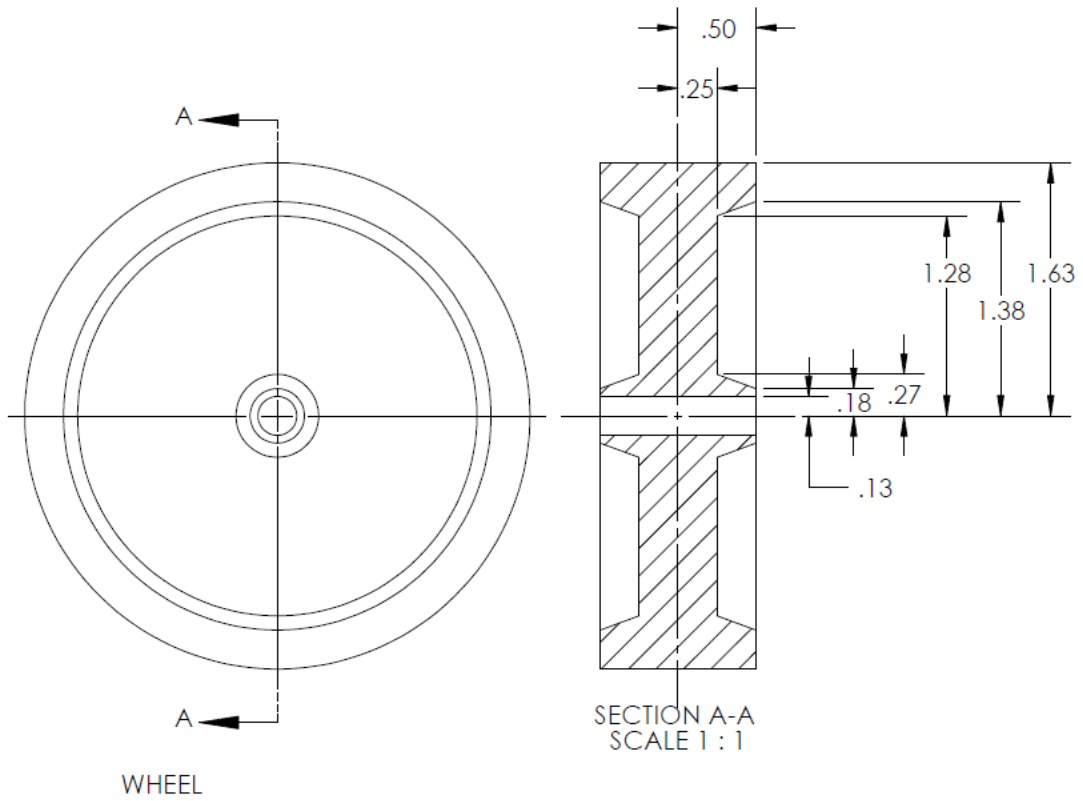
Orthographic Projection of Wheel in the Pulley Assembly
